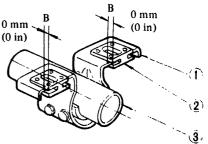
Standard dimension between column clamp and the top end of lower jacket tube
